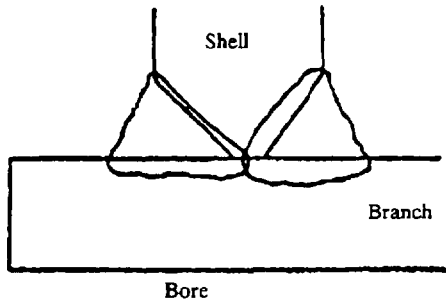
c : Fully penetrated "set through" weld.
